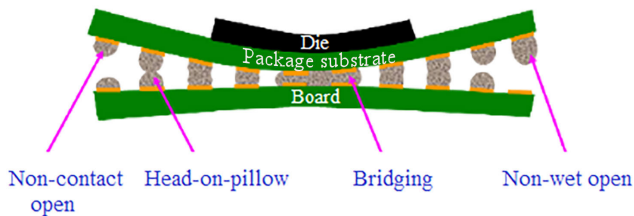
Typical solder joint defects induced by component warpage [24].
